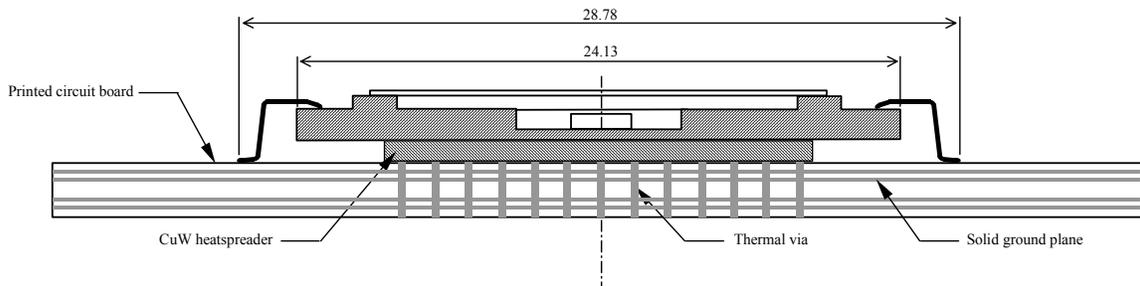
Rth CQFP868 ASSEMBLY WITH THERMAL HEATSINK
